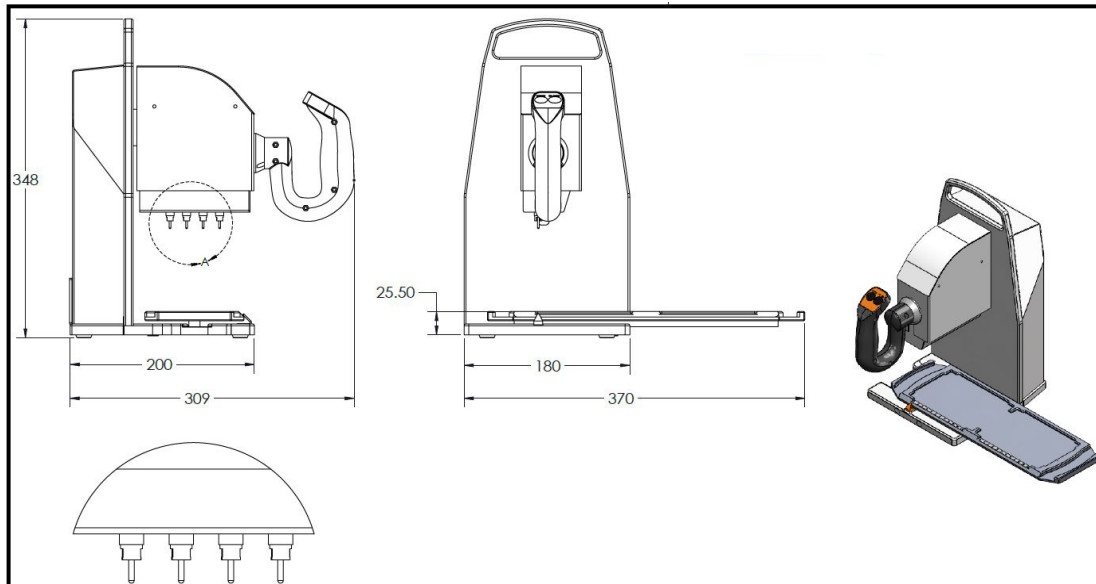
Semi-Automated Screw Cap Decapper 4 Dimension
